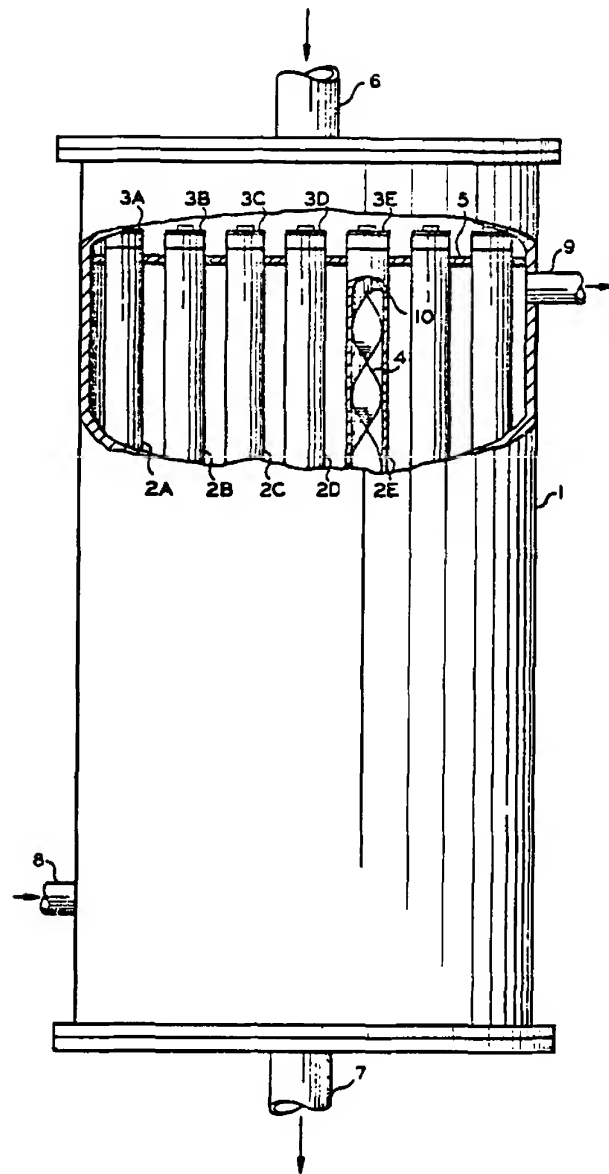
Rotating twisted tape installed in a shell-and-tube heat exchanger. Key: 1, shell-2A-2E, tubes; 3A-3E, mounting plate for twisted tape; 4, twisted tape; 5, tube sheet; 6, tube-side fluid inlet; 7, tube-side fluid outlet; 8, shell-side fluid inlet; 9, shell-side fluid outlet; 10, support rod that connects the twisted tape (4) to the mounting plate (3E). From Penney [42].
